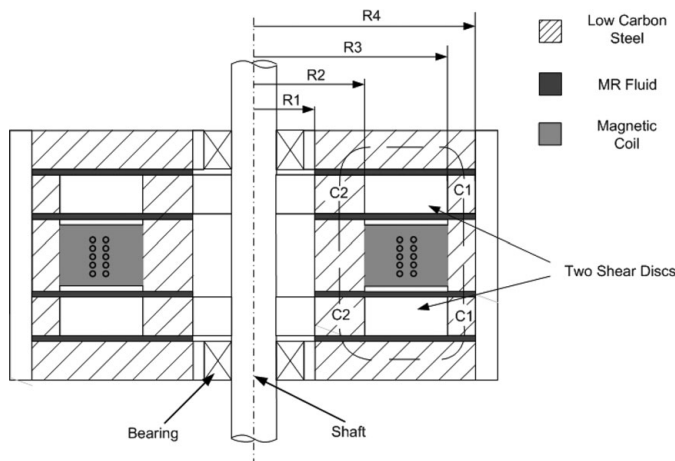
A schematic drawing of proposed MR fluid brake structure.
